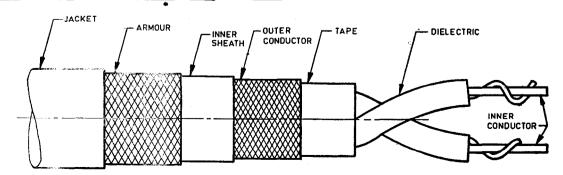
OUTLINE DRAWING (BALANCED CABLE)
